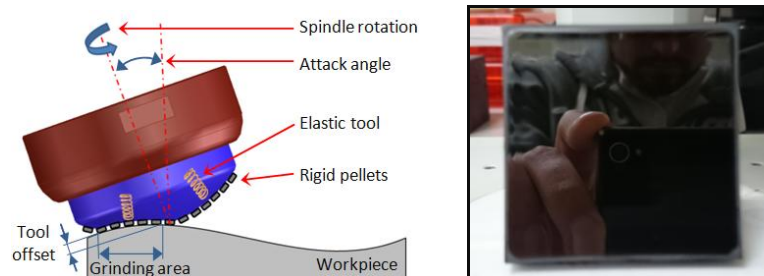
Principle of Shape Adaptive Grinding (SAG) tool [4] (left) and example of surface with optical mirror finish (right).
